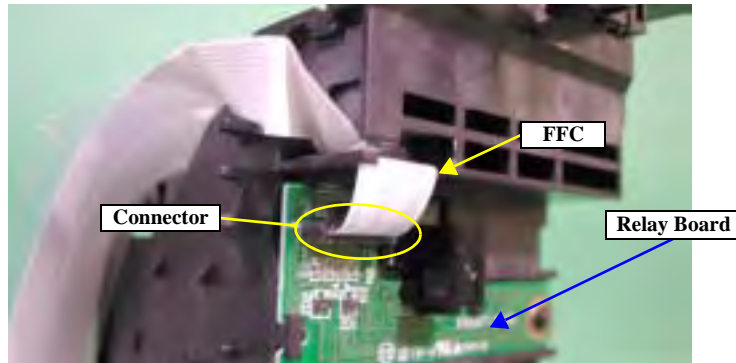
CR Guide Shaft/Carriage Unit Removal 3
